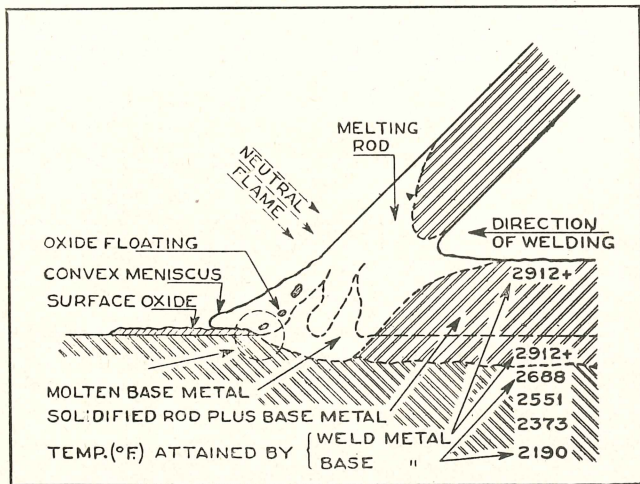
Diagrammatic Sketch showing roughly what takes place during Neutral Flame Welding.
